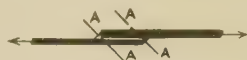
Lap joint loaded normal to lines of welding.
